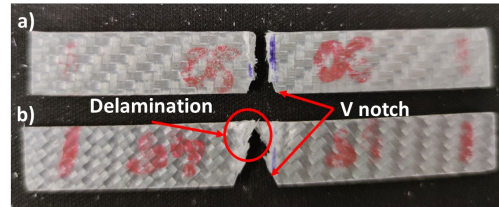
Fractured samples after impact test of a) 0/90, and b) -45/+45 samples.
